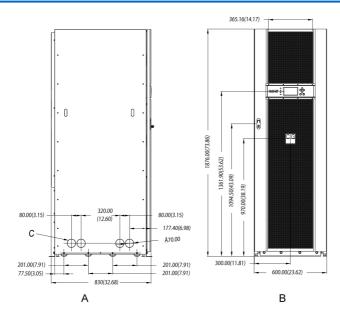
UPS cabinet dimensions 93E UPS 160-200 kVA (front and left side views)
